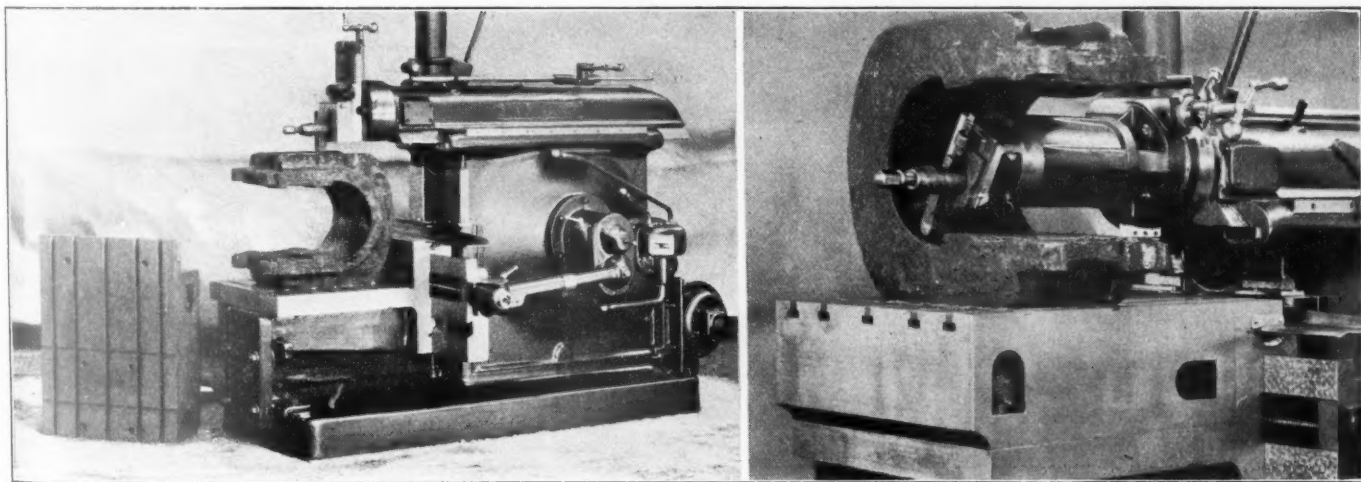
The view at the left shows the shaper set up for machining the shoe and wedge fit of a driving box with the special table on the floor—The right view shows the special table on the shaper with a driving box set up for machining the crown brass
